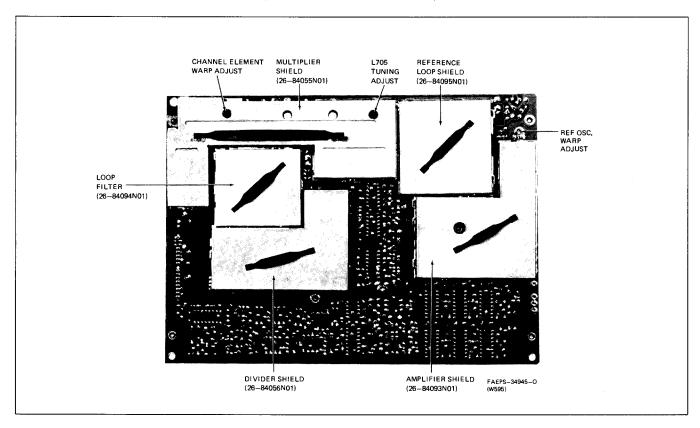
Synthesizer Board Solder Side Shield Location 68P81062E72
